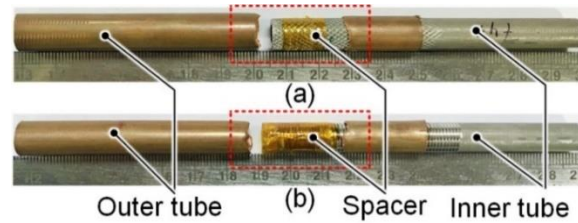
Crack failure (Tube failure) in (a) threaded and (b) knurled surfaced samples due to weaker tube (copper) failure
